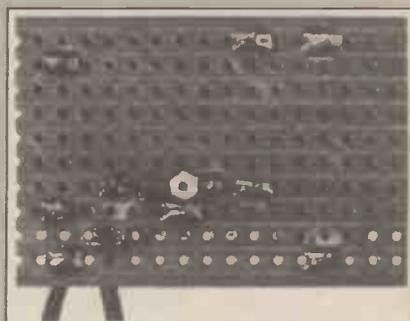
Photograph of the underside of a piece of stripboard containing the circuit of Fig. 1 built up according to Figs. 2 and 3. Compare soldered points and break with those shown in Fig. 2.
